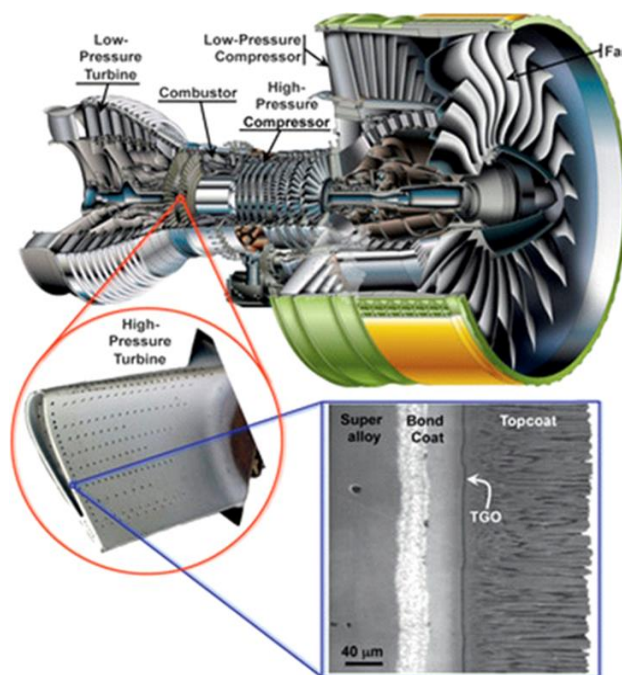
Main elements of a gas turbine engine and a turbine rotor blade with heat-shielding coatings.
